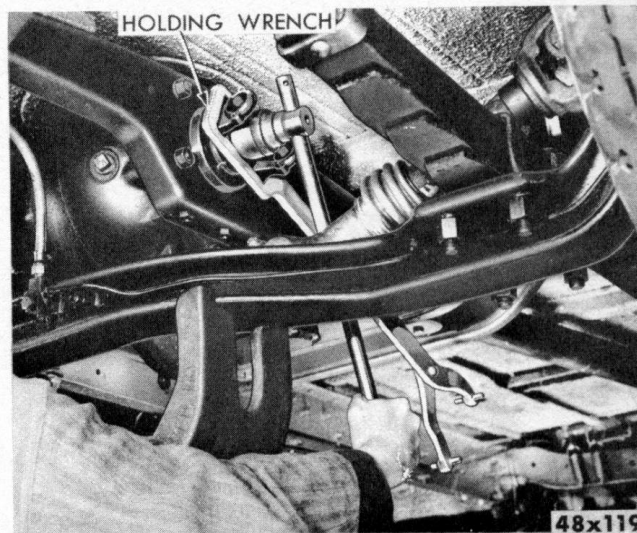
Removing Differential Drive Shaft Yoke Nut
